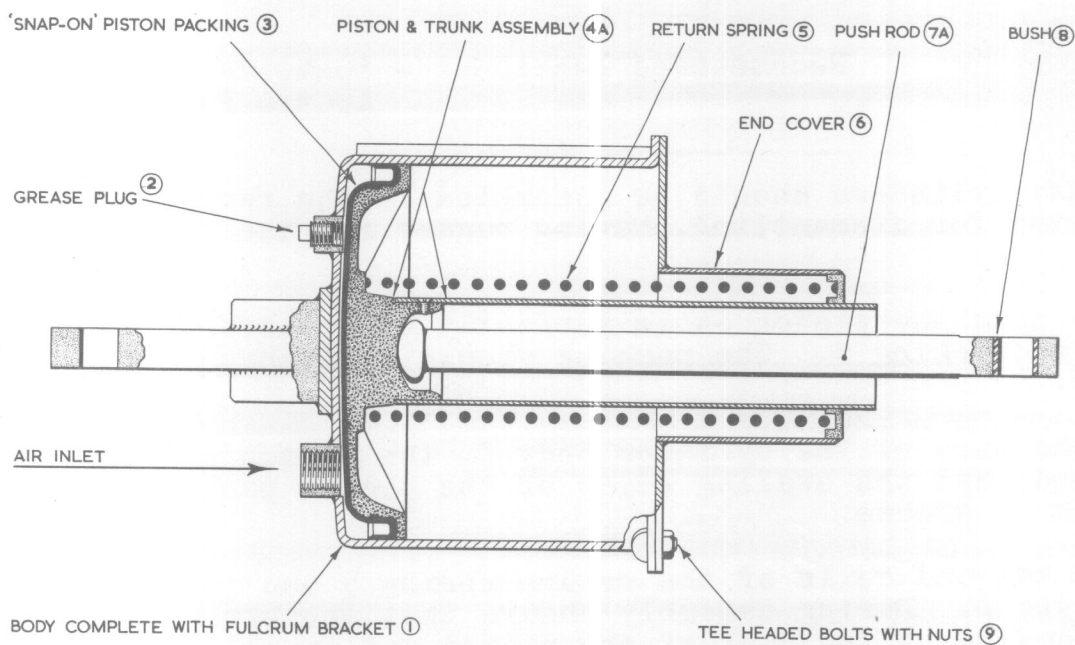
BRAKE CYLINDER WITH FULCRUM BRACKET (FABRICATED CONSTRUCTION)
